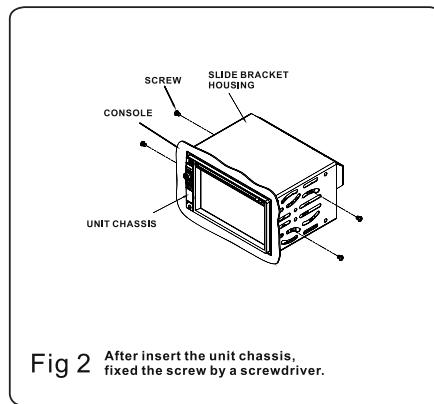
After insert the unit chassis, fixed the screw by a screwdriver.
